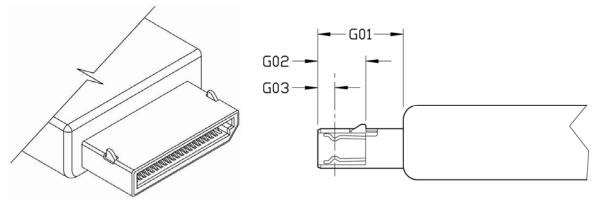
FREE	CABLE	ACTIVE	LATCH
